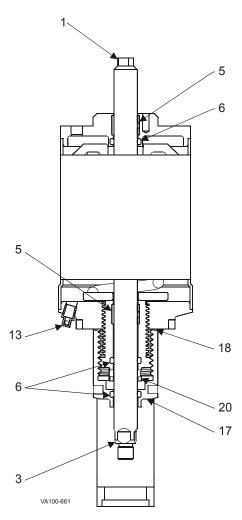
4", 5" and 6" Air-to-Lower, Adjustable-Spring Actuator
